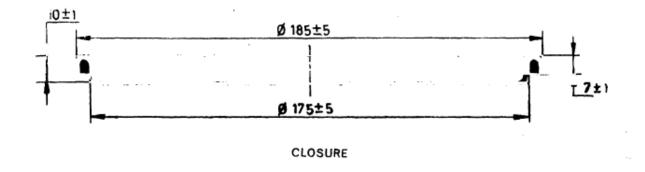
DIMENSIONS FOR BITUMEN DRUM
